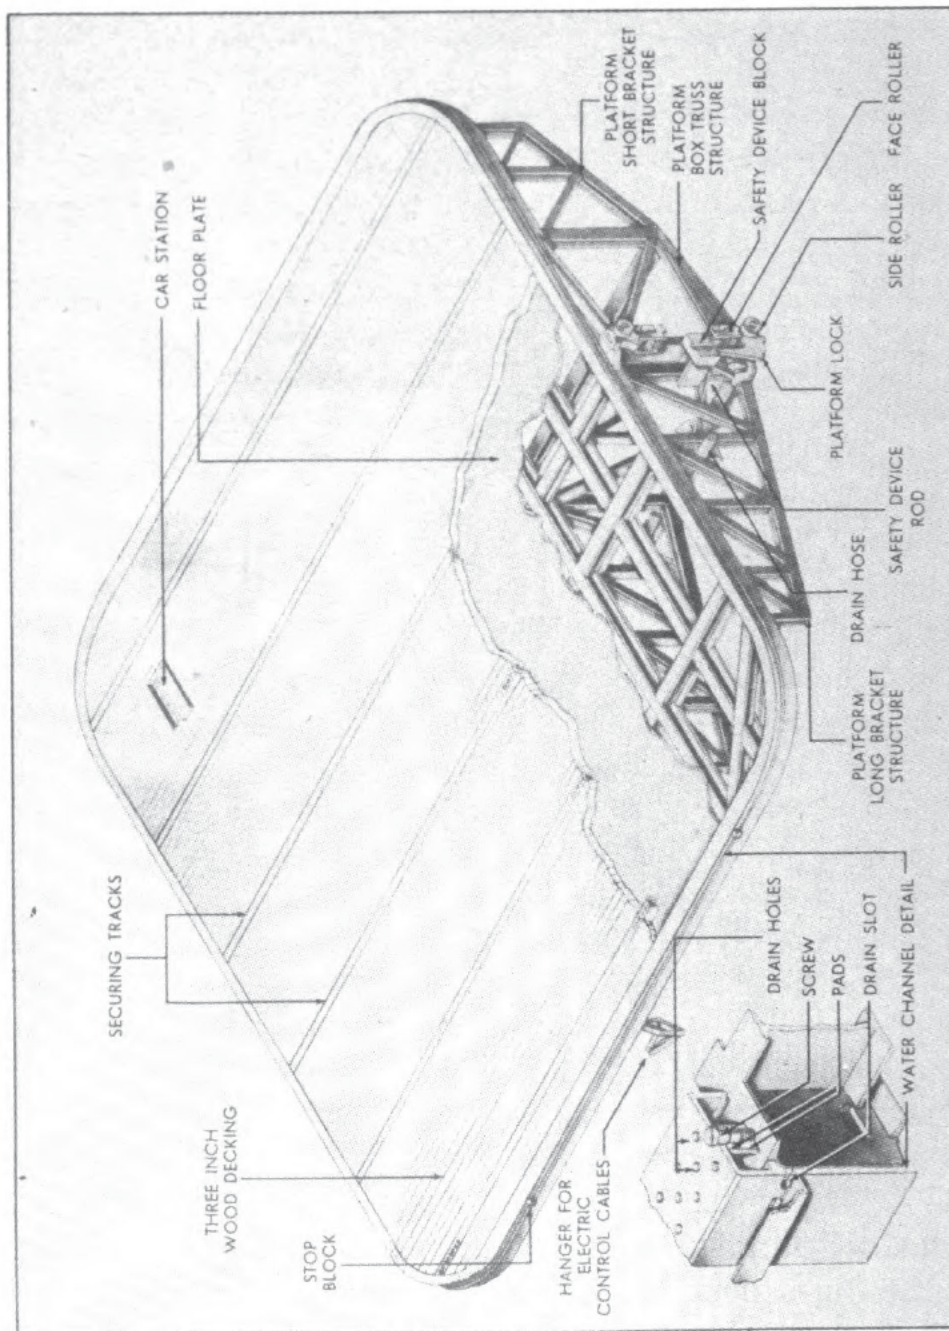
A typical elevator platform of an aircraft carrier.
